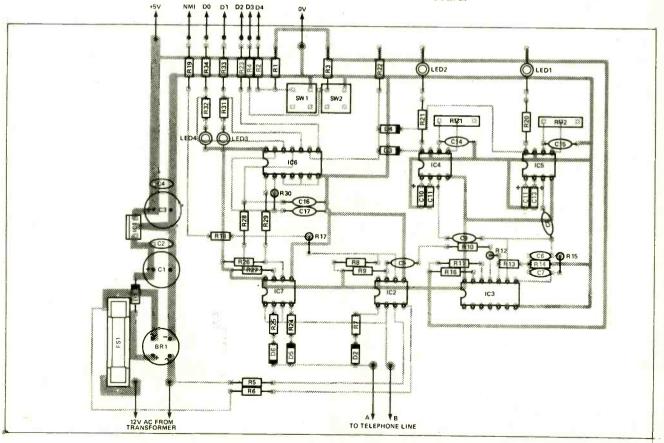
(above) Component overlay for the main PCB and Fig. 2 (below), component overlay for the power supply and interface board.
